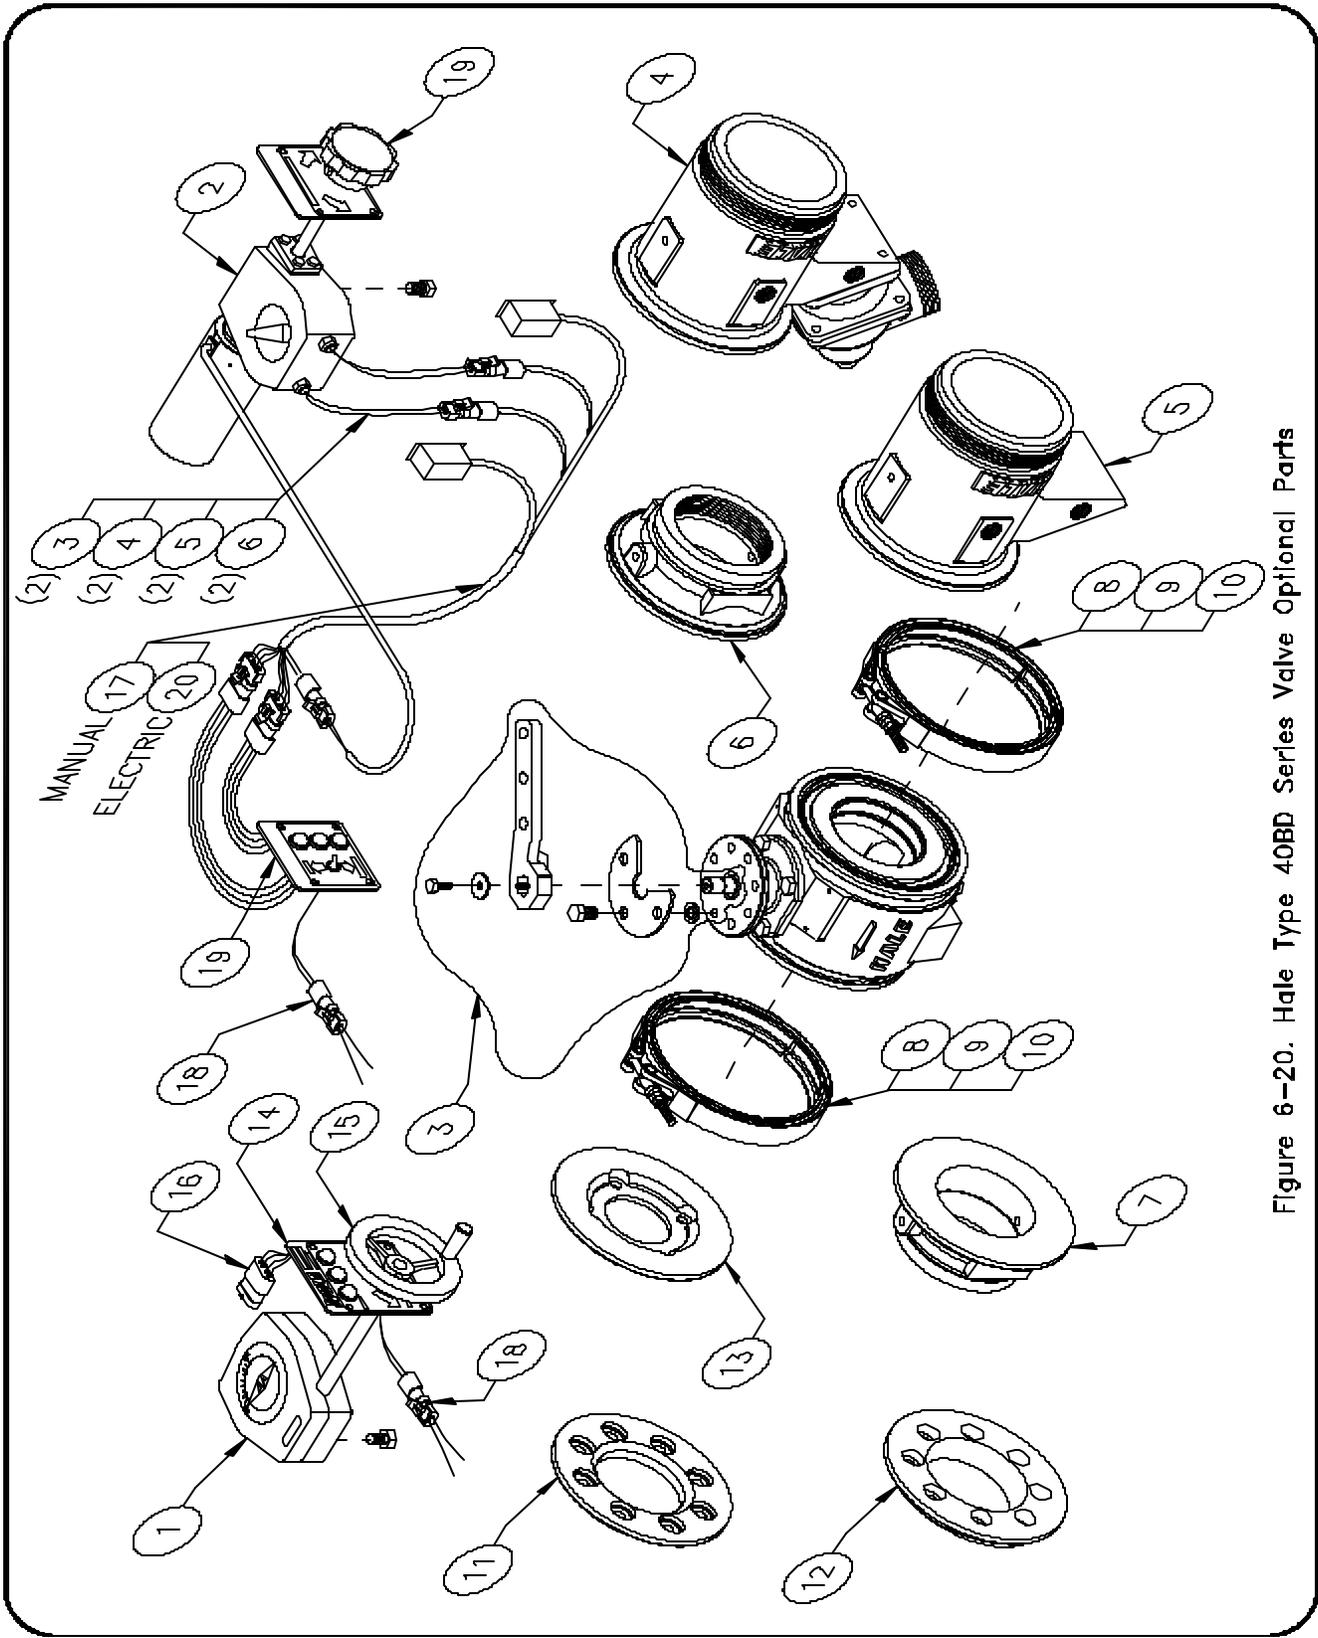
Hale Type 40BD Series Valve Optional Parts
